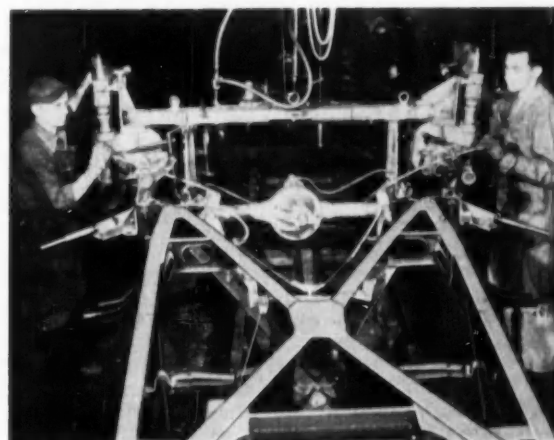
A winding fixture was specially designed to wind up the torsion bars on the production line.
